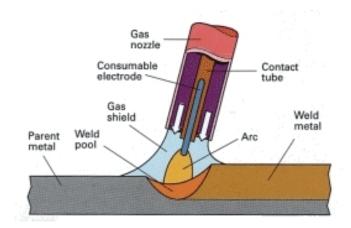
Mig welding weld pool process (TWI Global, 2016)
